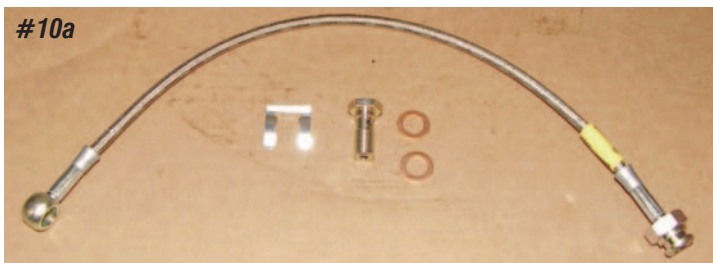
& 10b & 10c: The upgrade kits P/N 20-232 and 20-233 include a steel braided brake kit. The brake hose is held to the caliper with a supplied banjo bolt. Install a copper
